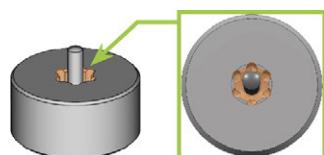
RECESS IN KNURLED NUT (MARKED ORANGE)
